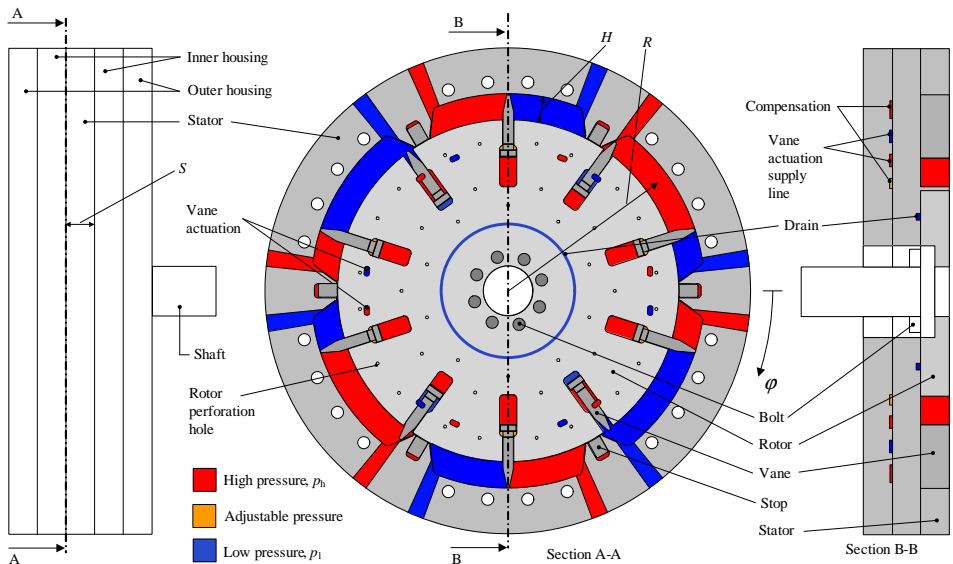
The motor principle with hydraulic pressures indicated at the section views.
